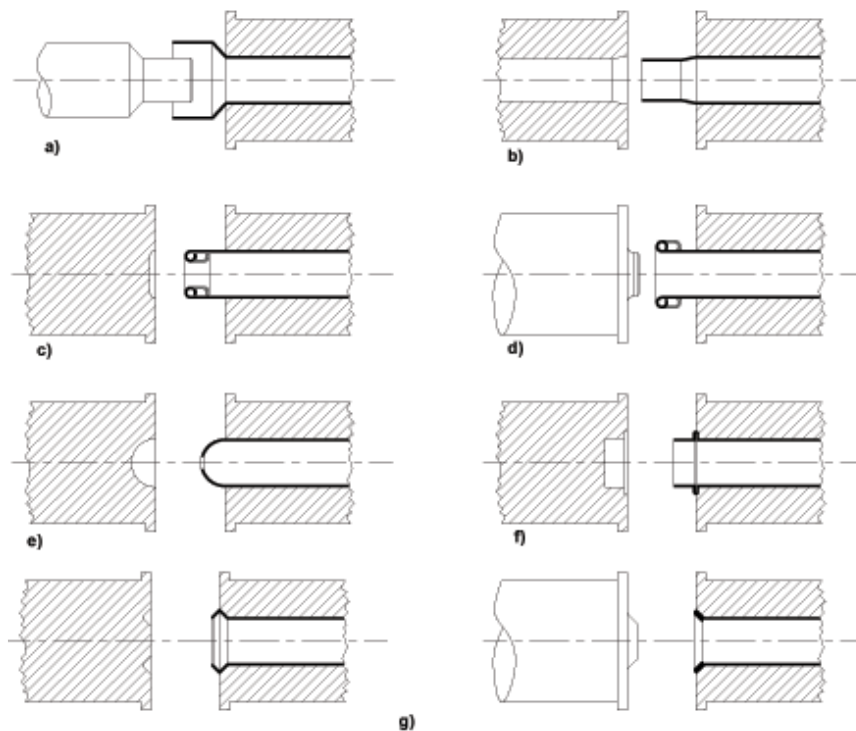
Tube end forming processes: (a) expansion, (b) reduction, (c) internal inversion, (d) external inversion, (e) nosing, (f) compression beading and (g) flaring. (Alves, Medeiros, and Martins 2011)
